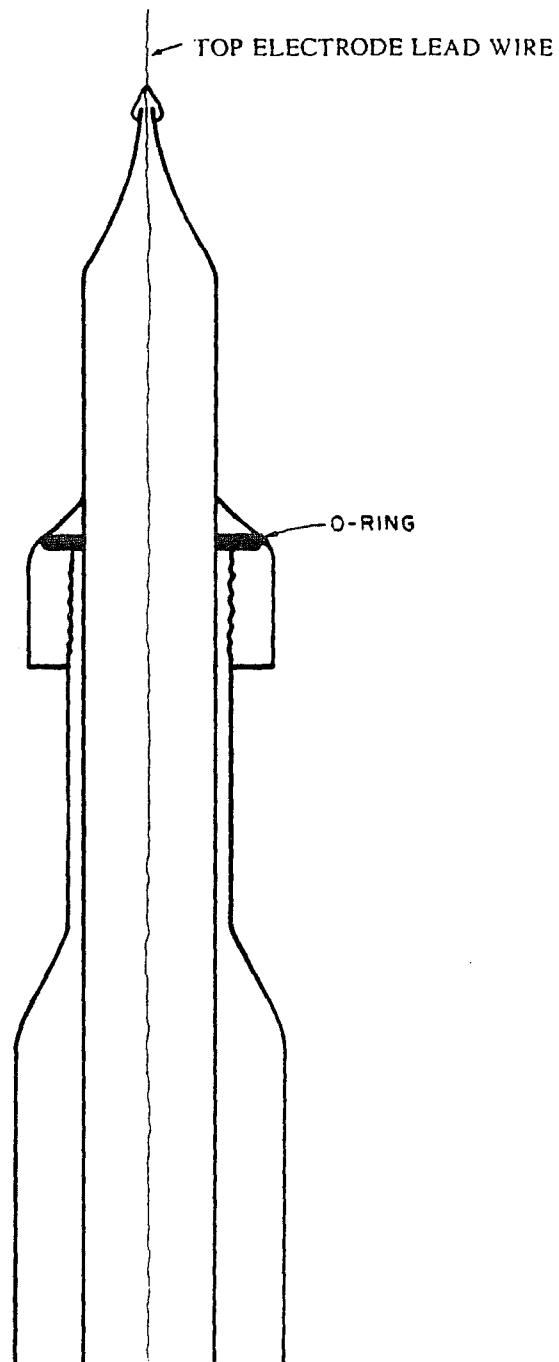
Details of the top electrode wire and o-ring assembly for needle to plane electrode gap distance adjustment
